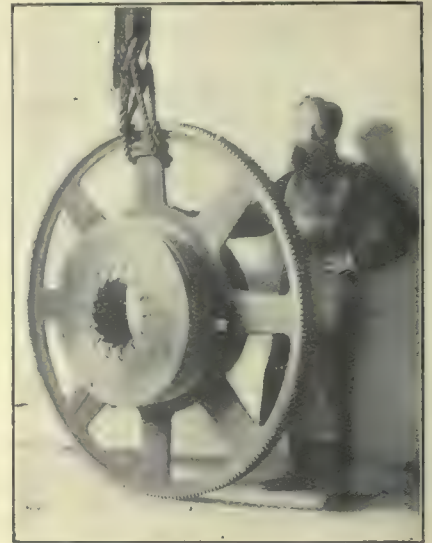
Main Driving Gear With Cutter Drum and Blade Complete.
